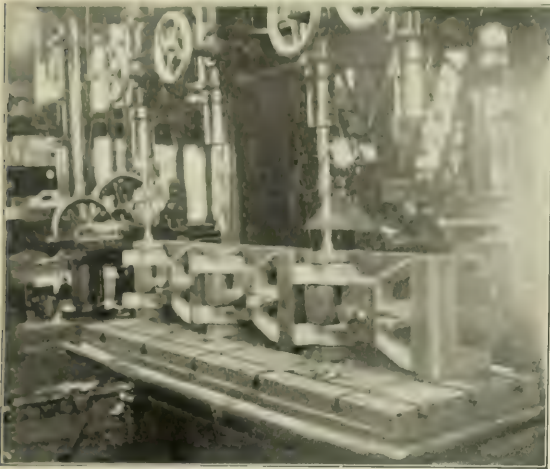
Old Type Contact Shoe Jigs as Used on Drill Press.
